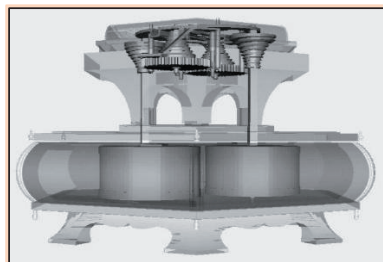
Drawing of Fusees and Springs inside of Mannen-dokei
